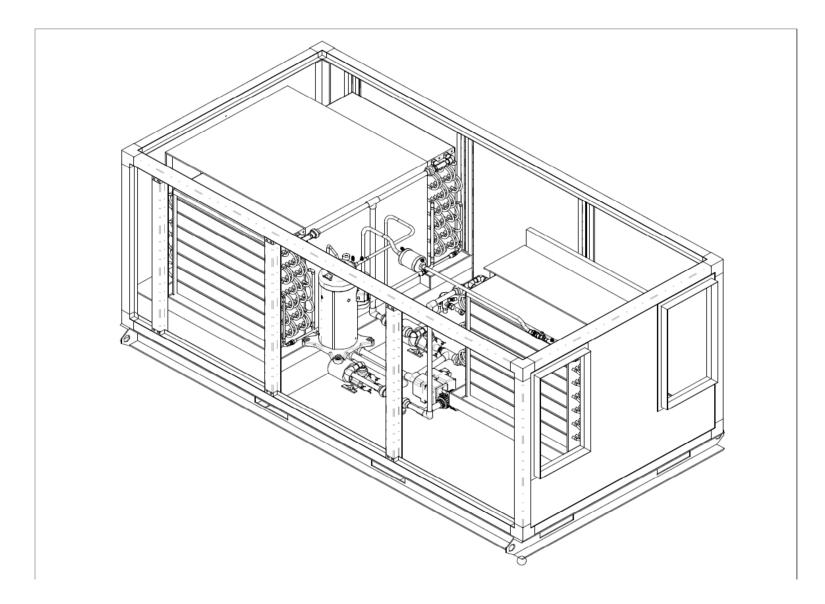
(continued) – Engineering Drawing of the LDDX-WF Prototype
